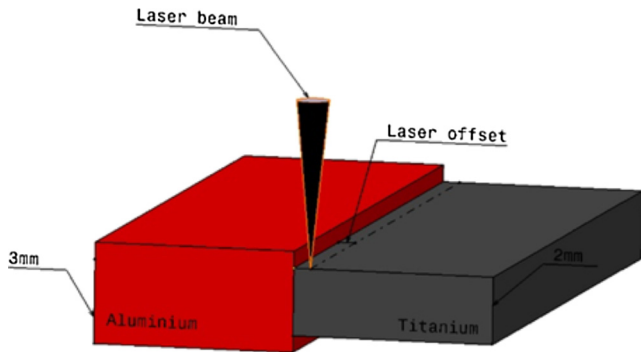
Scheme of laser welding on AA5754/Ti6Al4V.
